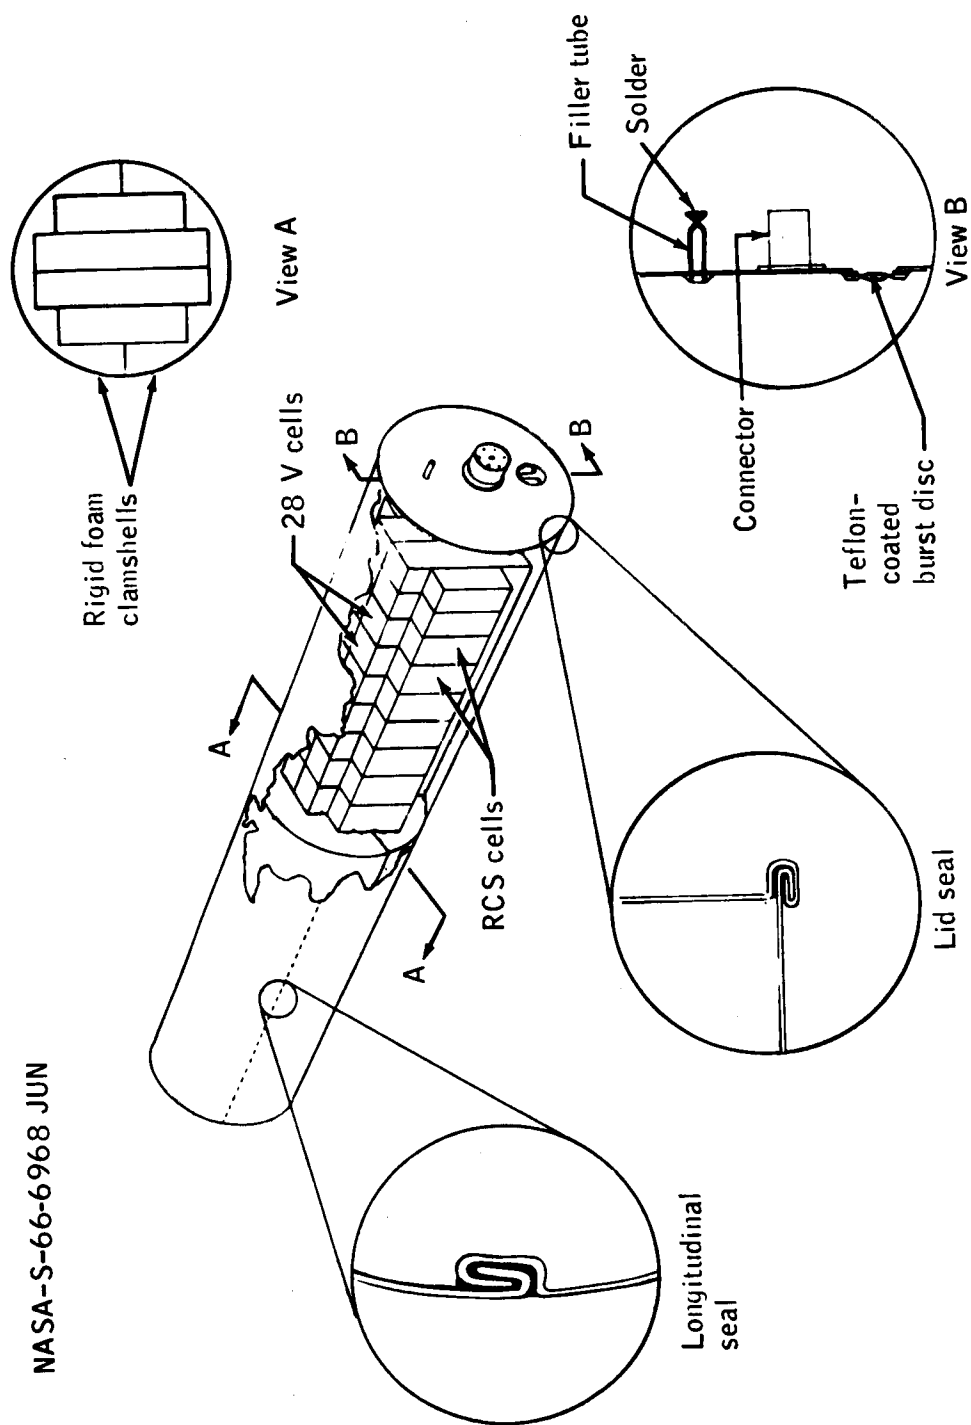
Astronaut maneuvering unit battery pack assembly.
